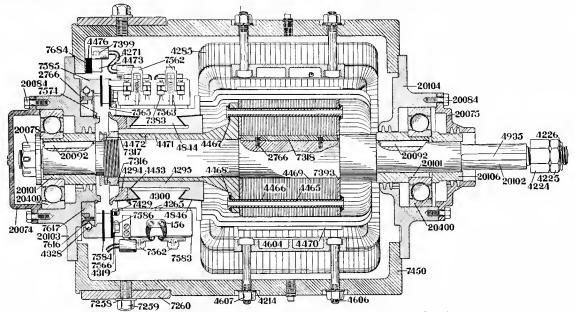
Section Through 2.6 K. W. Dynamo with Ball Bearings.
